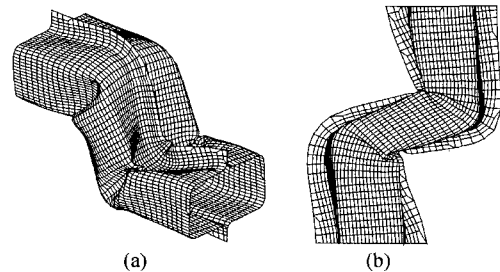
Deformed shapes of an S-rail with only formed shape: (a) isometric view; (b) front view
